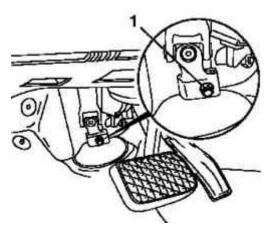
Bolt kreleniya intermediate shaft steering column: 1 - Bolt
